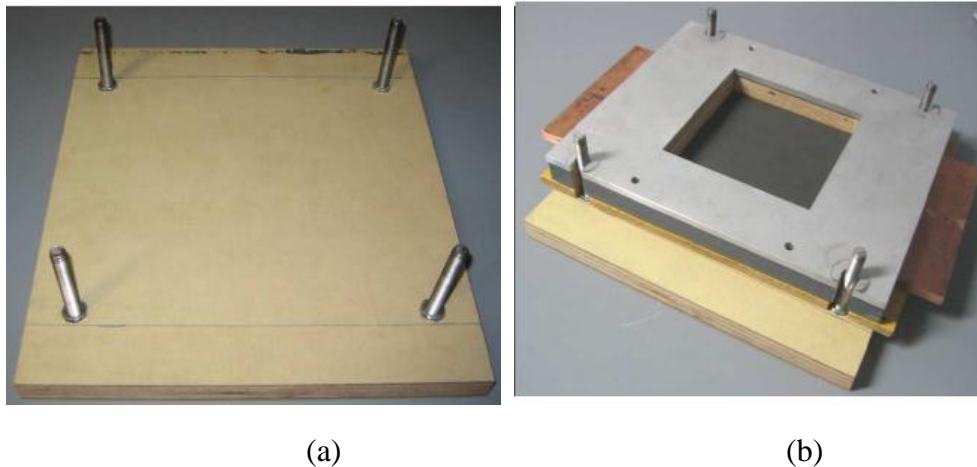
Bench-top Mount (a) Alone (b) With Fixture (Zantout, 2009)
